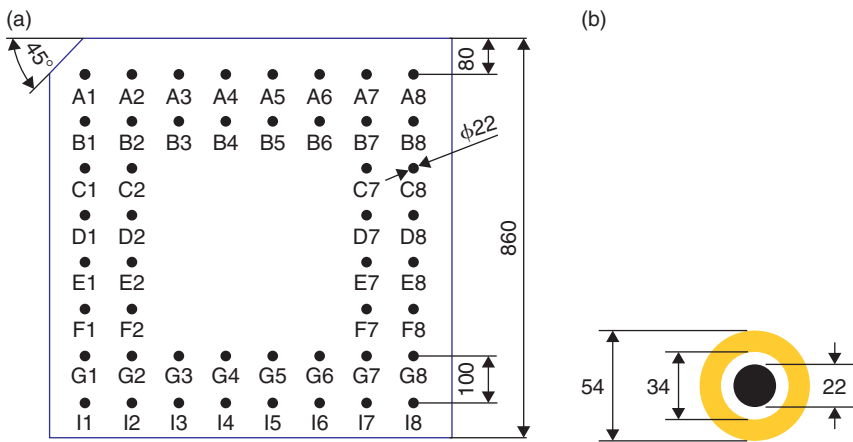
Pin grid array design requirements (units in mils). (a) Package dimensions. (b) Padstack parameters.
